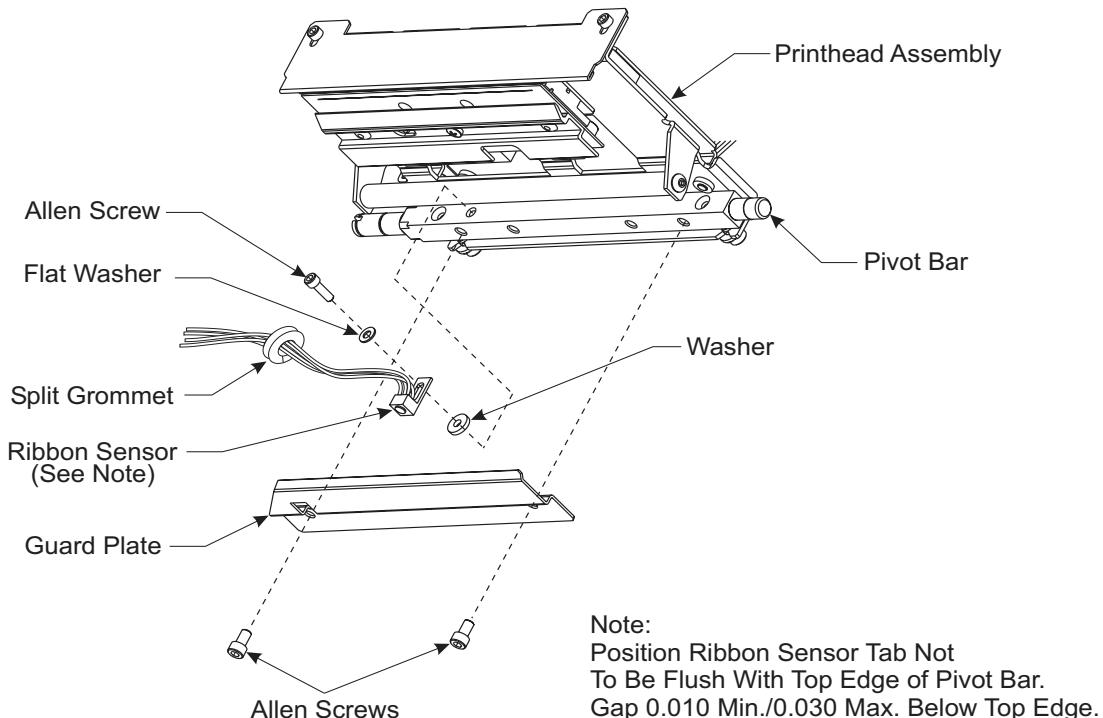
Ribbon Sensor, Guard Plate and Printhead
